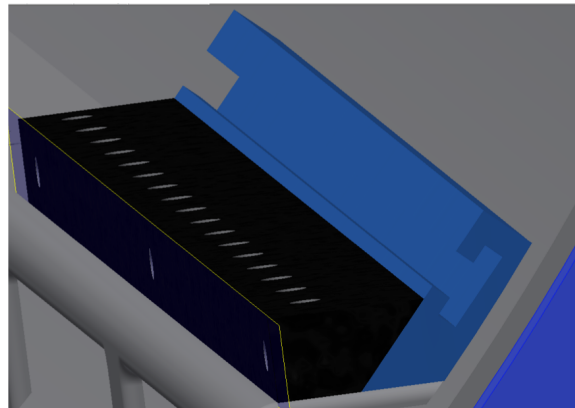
CAD image of the T-bar rail design modified to be more feasible to machine. The colours are artificial, to highlight the components. The black piece screws onto the existing rail within the chamber. The blue piece then slides behind it.
